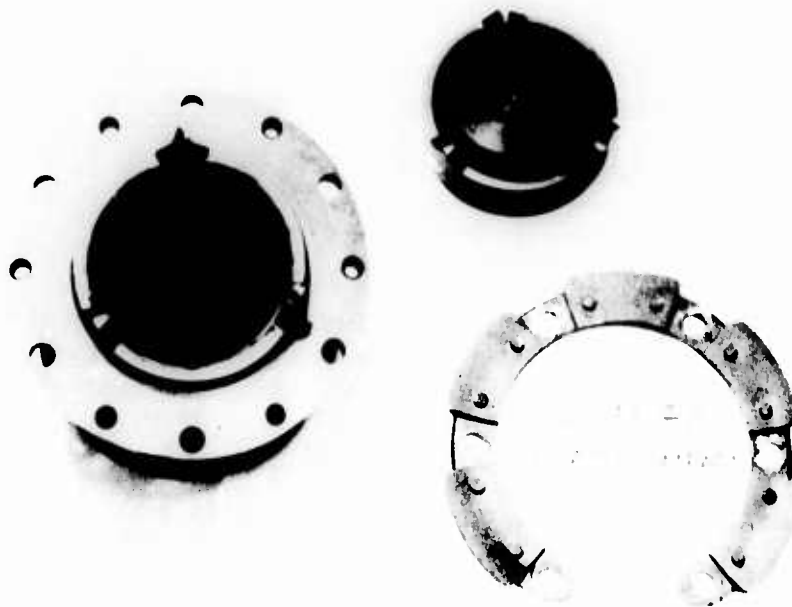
Valve Sections and Frangible Retainer After Removal From Test Fixture.
